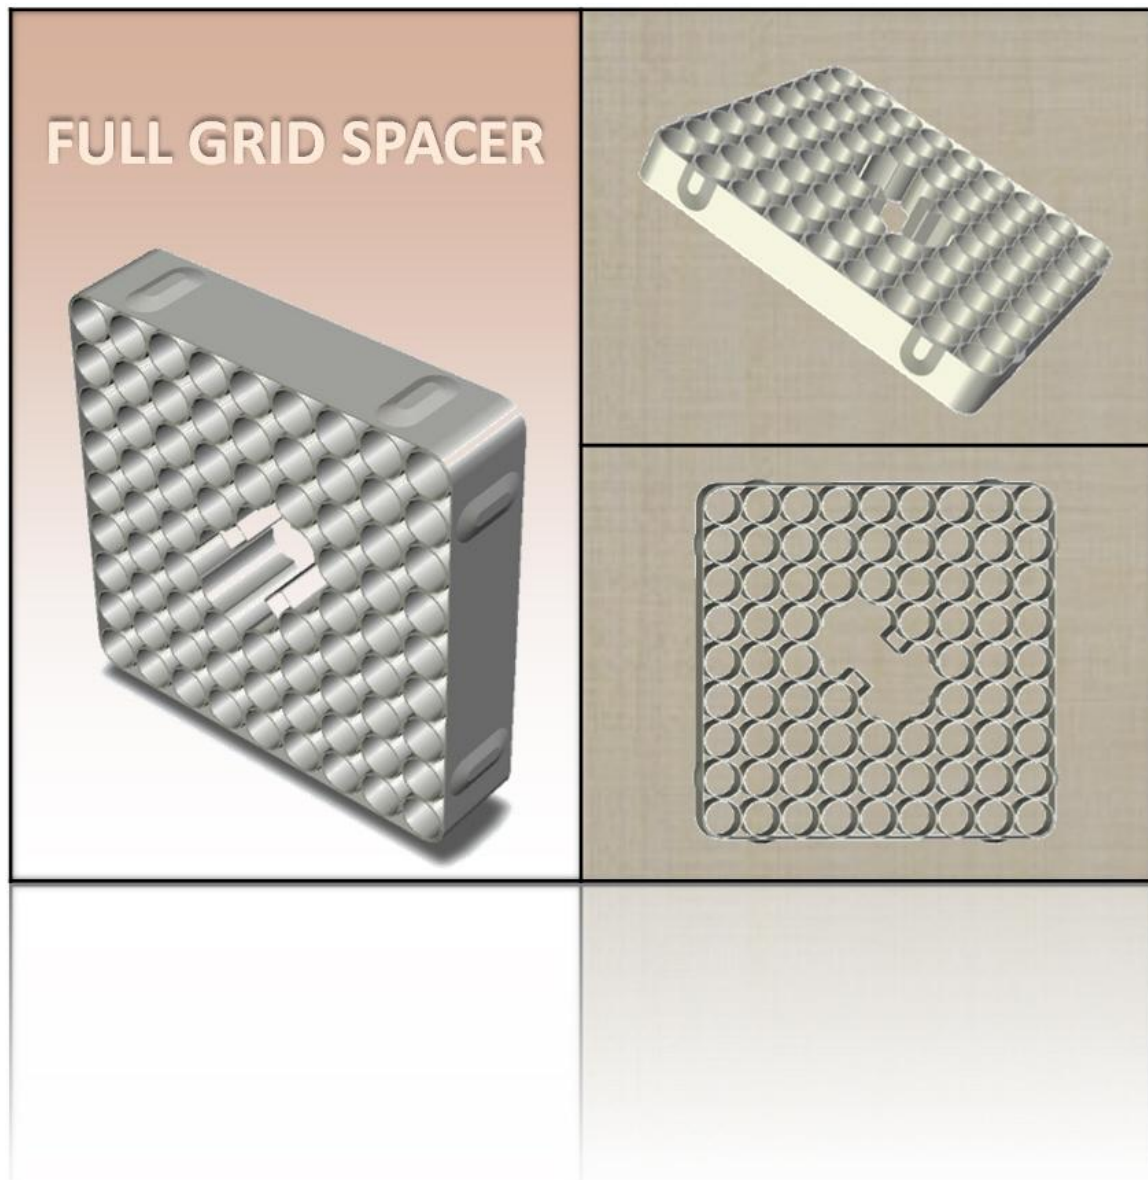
CAD solid model of assembly fully-populated spacer.
